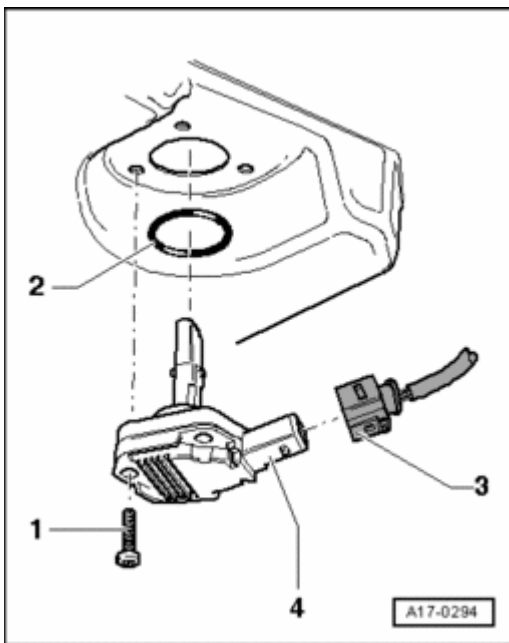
Removing And Installing Oil Level Thermal Sensor -G266-
